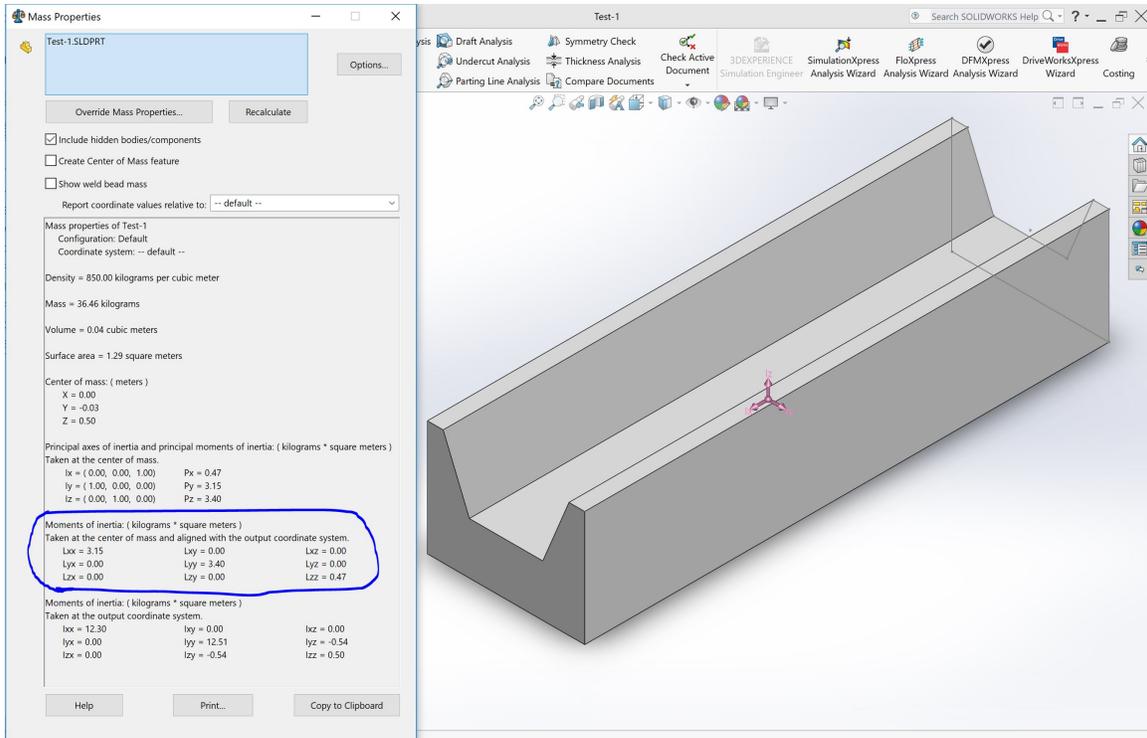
Moment of inertia details of trapezoidal shaped non-uniform storage tray
